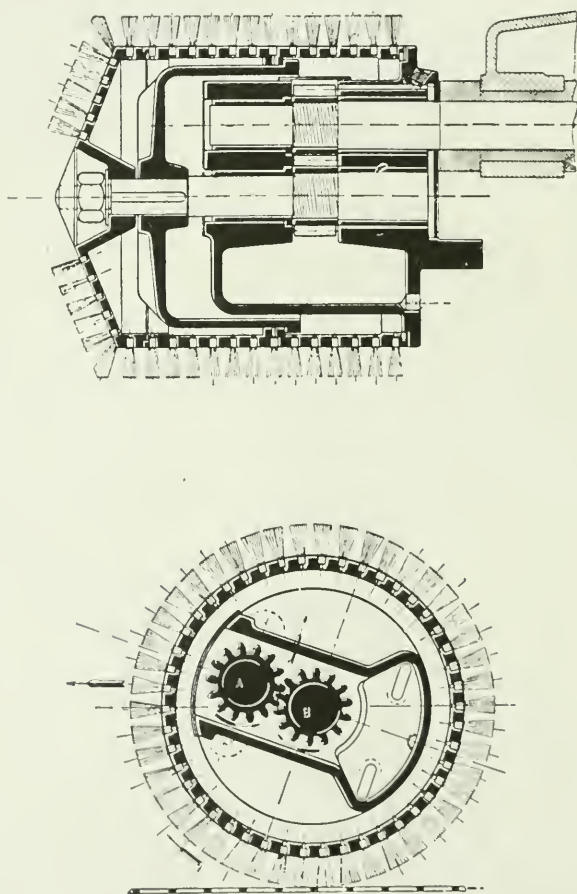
The Gear Driving Mechanism of the Rotating Brushes
